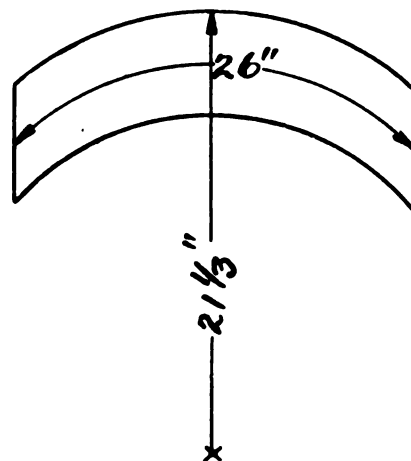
SHOWING DIMENSIONS OF RADIUS AND THE REQUIRED AMOUNT OF STOCK FOR THE EDGE BEND
